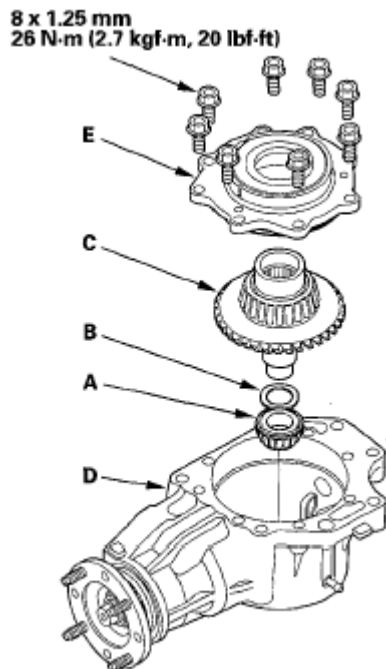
Identifying Tapered Roller Bearing, Thrust Shim And Transfer Drive Gear-Shaft Assembly With Torque Specifications
